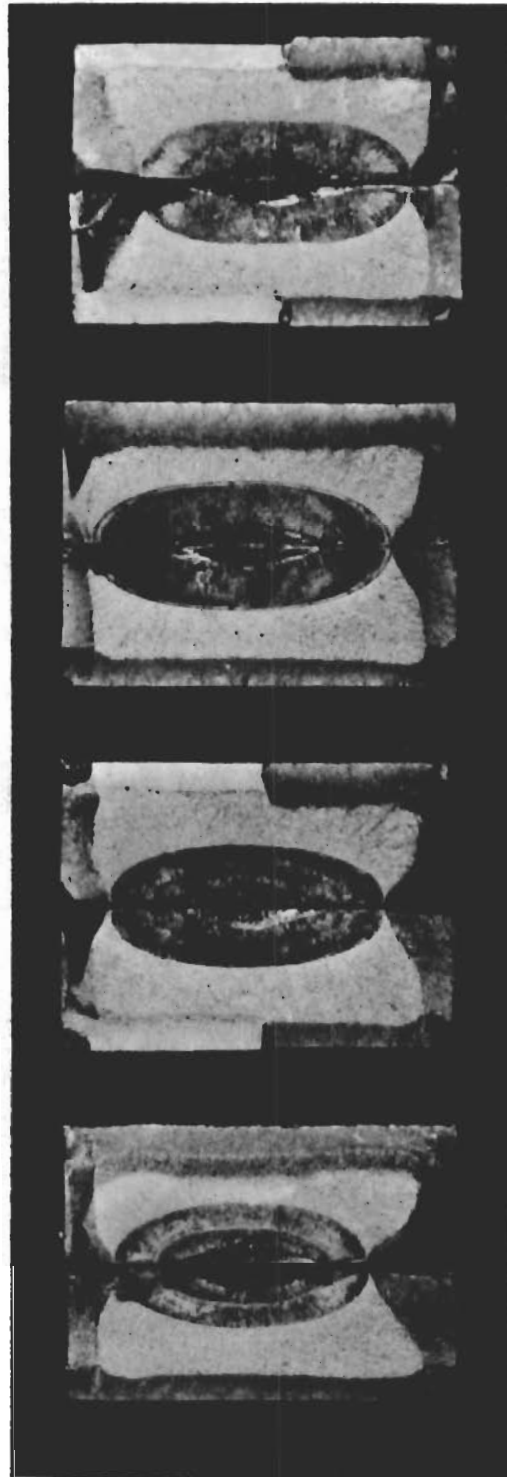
Part-Through-Crack Fracture Surfaces - D6aC 1100°F 0.1 in.
